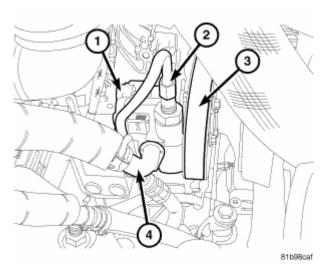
Identifying Pump, Pressure Power Steering Hoses, Serpentine Belt & Supply Hose Courtesy of CHRYSLER LLC
